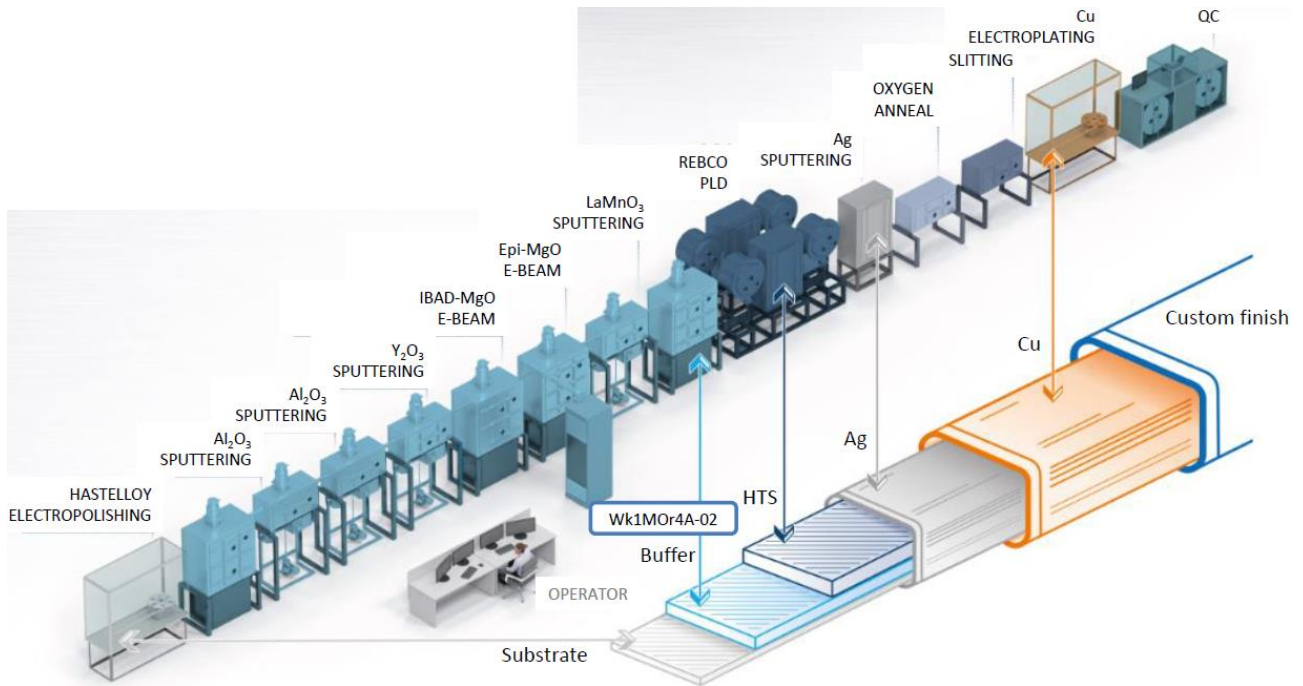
Production line of a REBCO tape at the manufacturer SuperOx [21].
